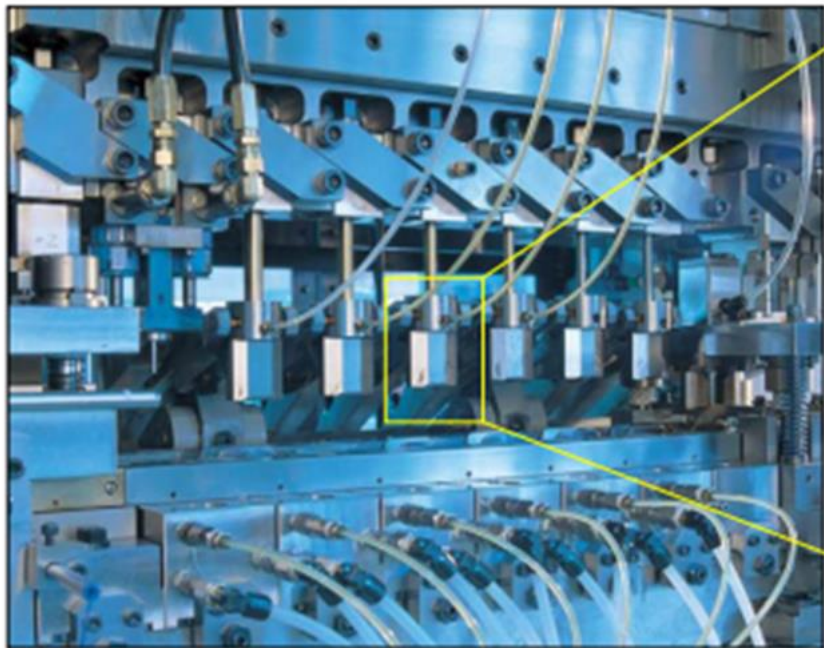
Multi-process transfer mold machine (Asahi-Seiki Manufacturing Co., Ltd.) [1].
